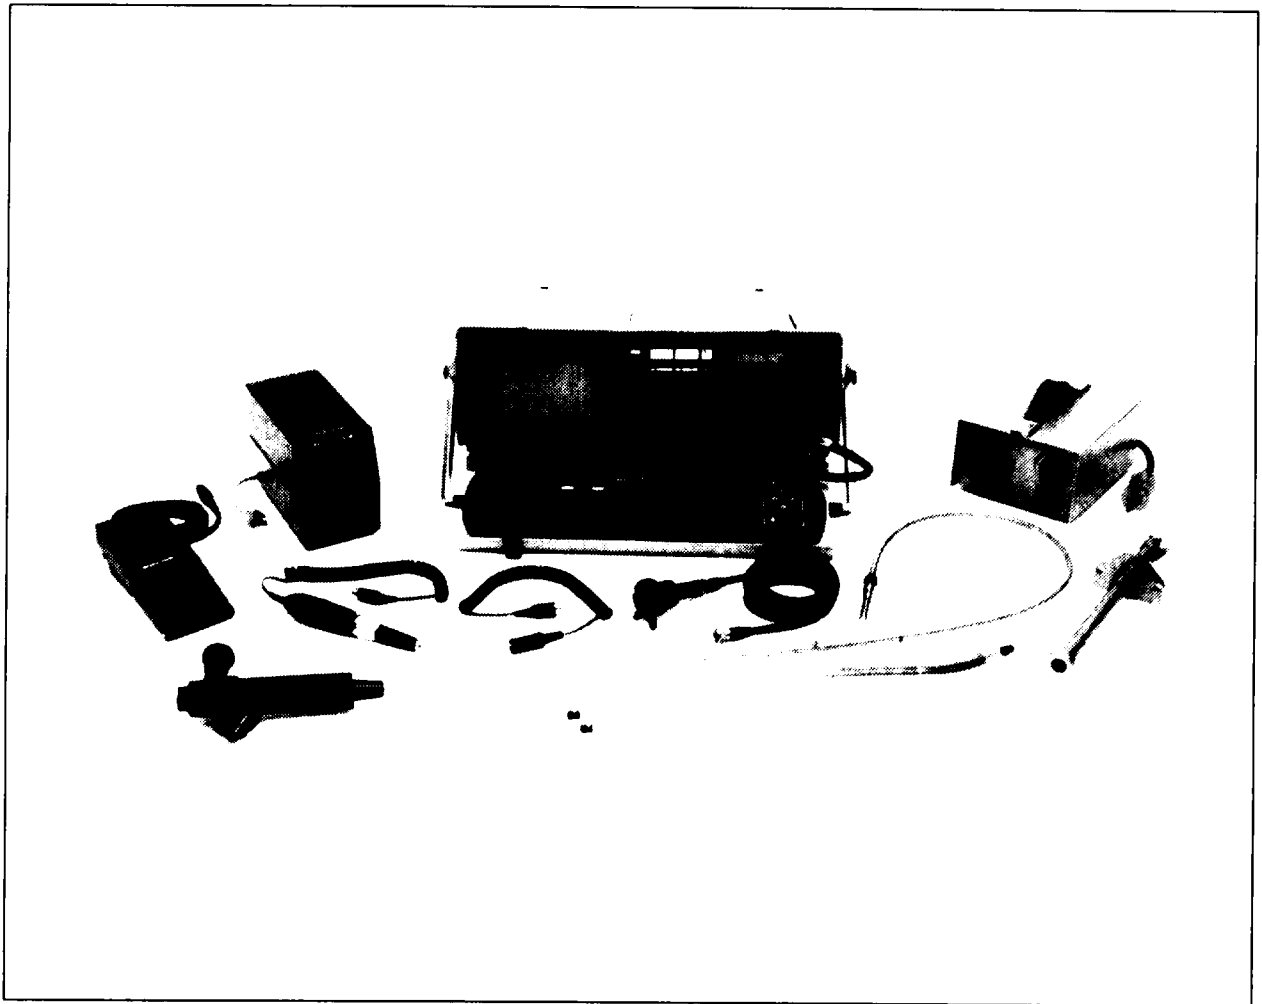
POWER BLENDING BORESCOPE KIT
